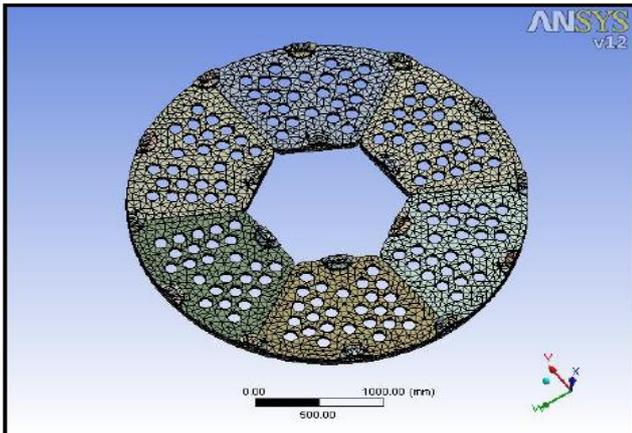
Meshed Model of complete Filter sheet Plate Assembly
